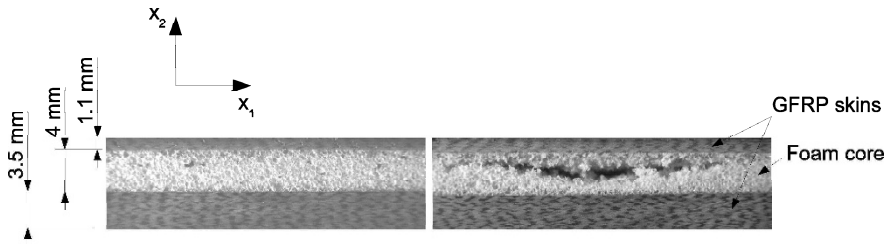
Cross sections of an undamaged and of a damaged sandwich structure.
